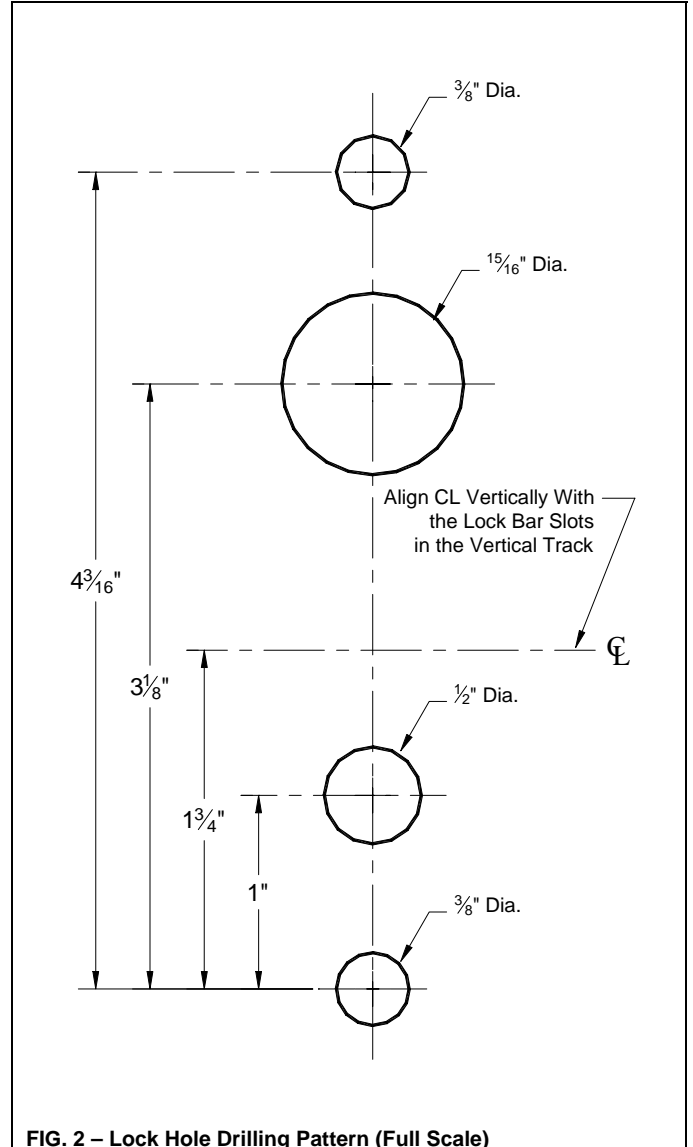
Lock Hole Drilling Pattern (Full Scale)
